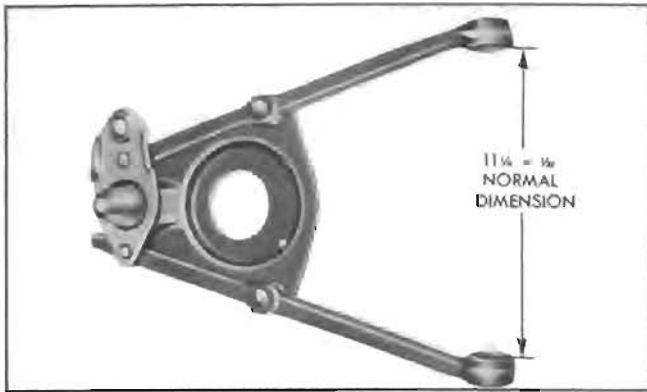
Correct Spacing of Control Arm Inner Ends
